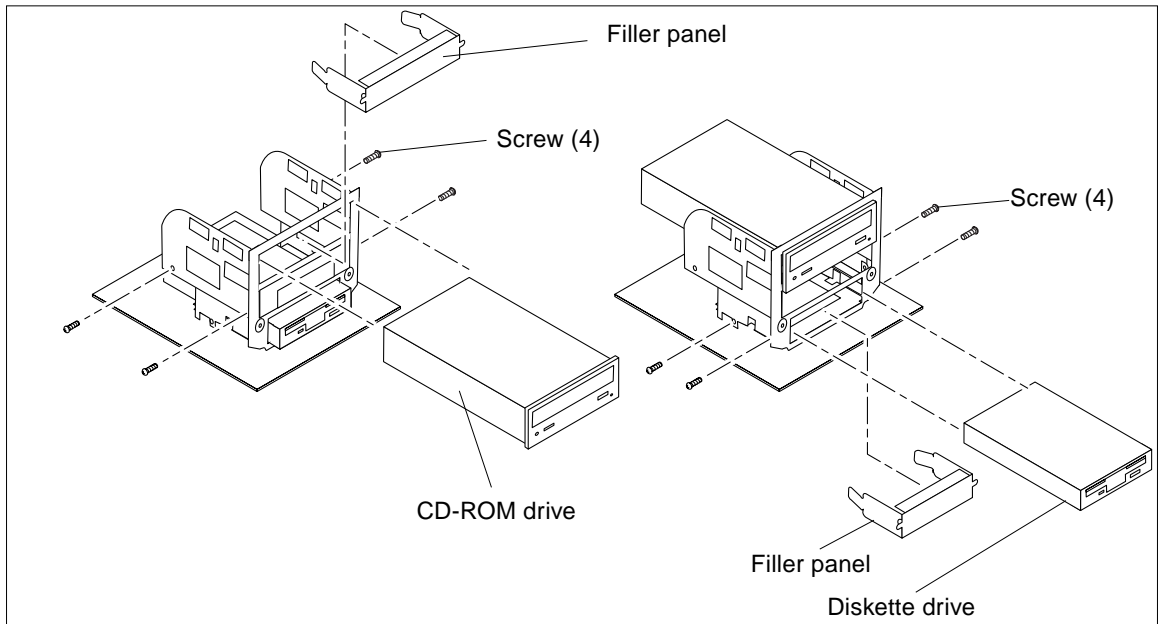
Removing and Replacing the CD-ROM Drive/Diskette Drive
